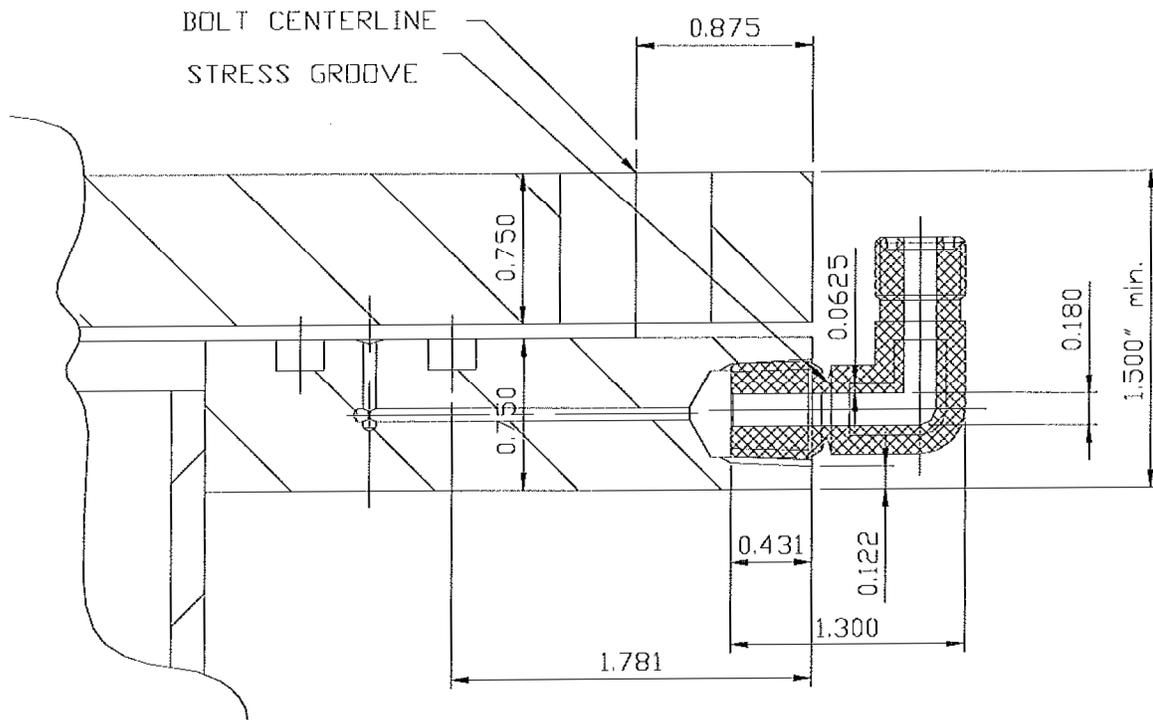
Dimensions of the Elbow Fitting used for Test Port Option 3
